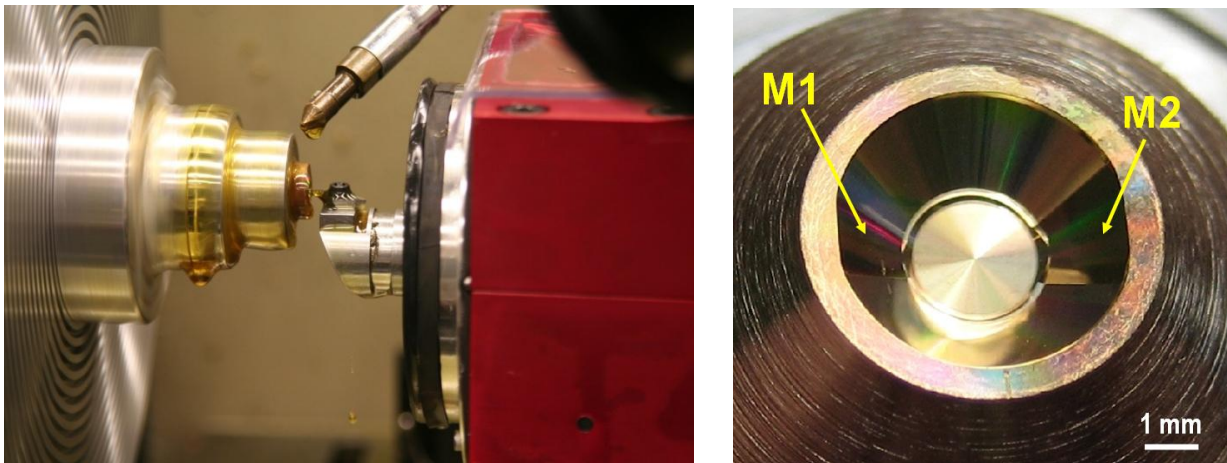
FLORA II machining prescan mirrors (left) and finished part (right).
